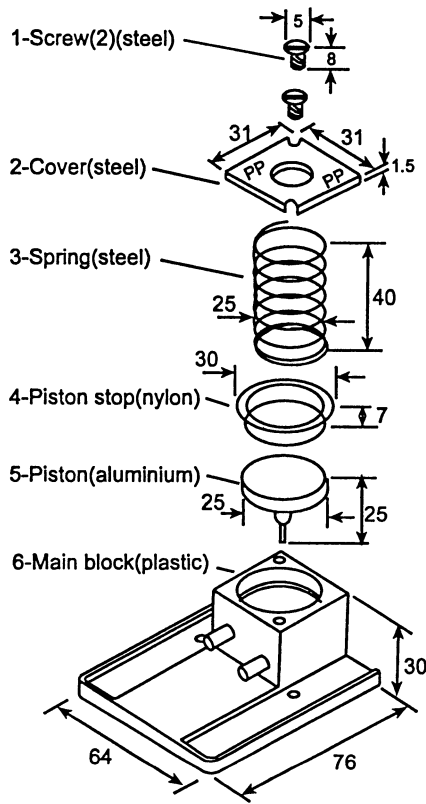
Pneumatic Piston Subassembly (Dimensions in mm). (Reproduced from [12])
